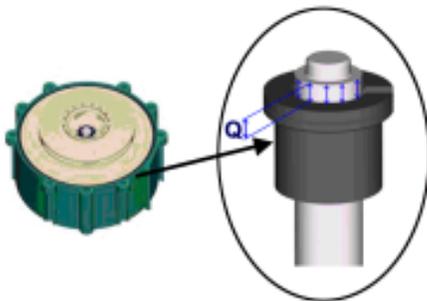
F - Correct alignment sub-assembly impeller - shaft
